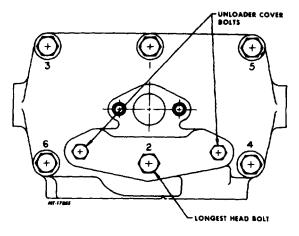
Cylinder Head Bolt Tightening Sequence CYLINDER HEAD INSTALLATION
